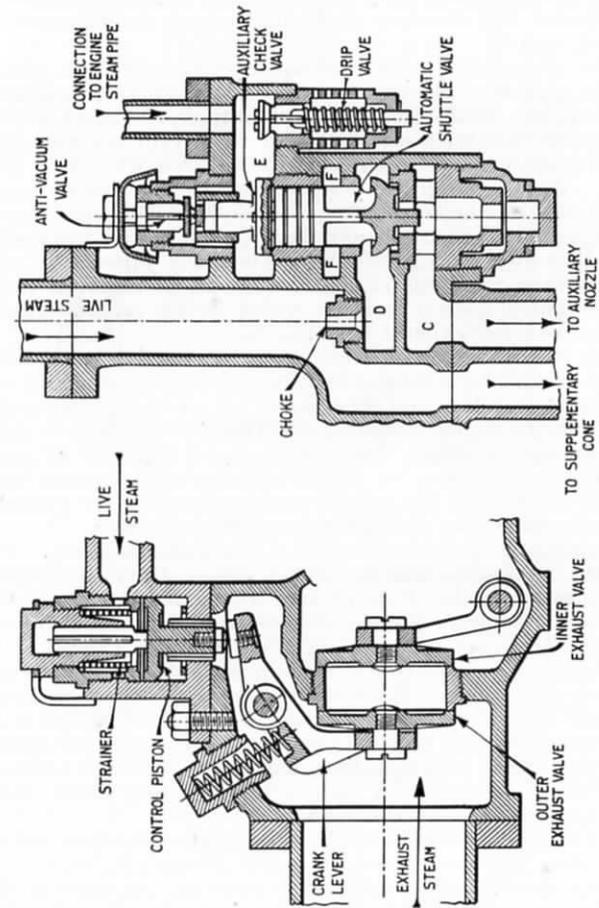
SECTION THROUGH AUTOMATIC VALVE AND DRIP VALVE.
